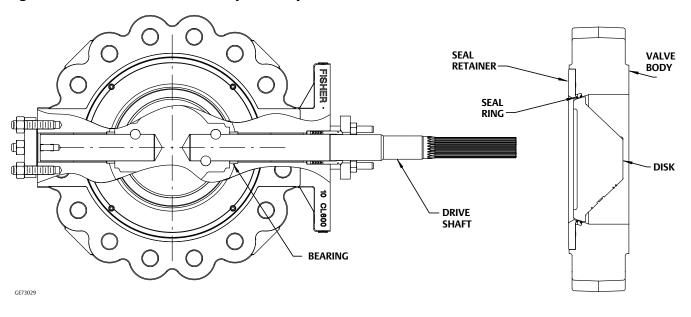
8590, NPS 8 to 24, Valve Body Assembly 🗇
